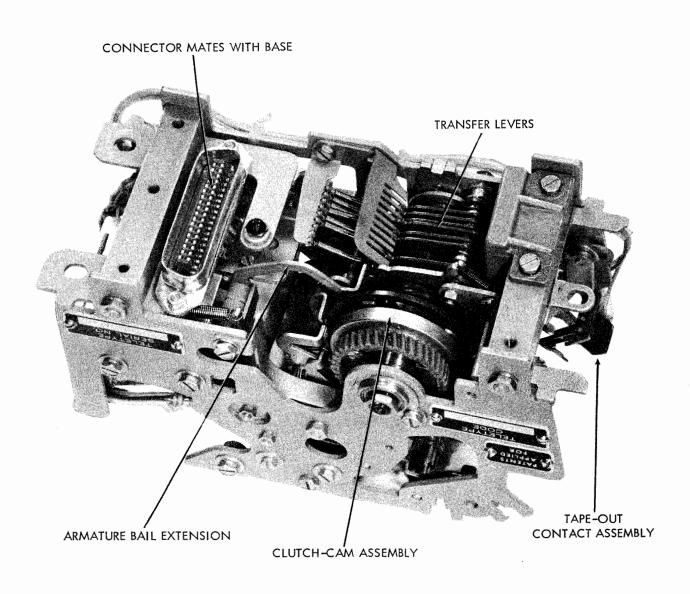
A. TRANSMITTER DISTRIBUTOR TT-311/UG (BOTTOM VIEW)
